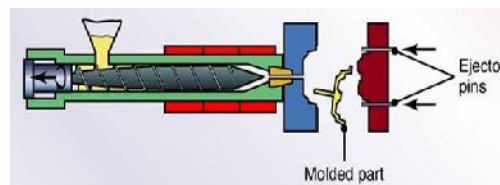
After is solidified or cured, the mold opens, and ejector pin remove the molded part.
